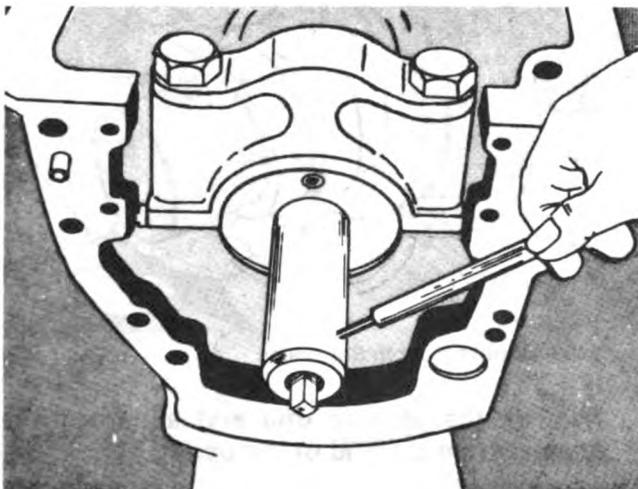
Install The Drive Adapter Into The Boring Bar.
